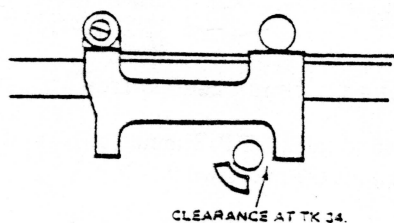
CARRIAGE LIMITER CLEARANCE
